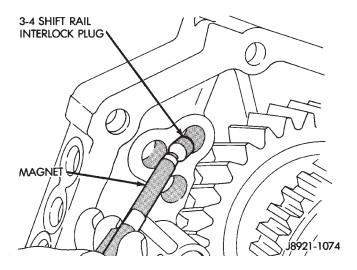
Removing 3-4 Shift Rail Interlock Plug
